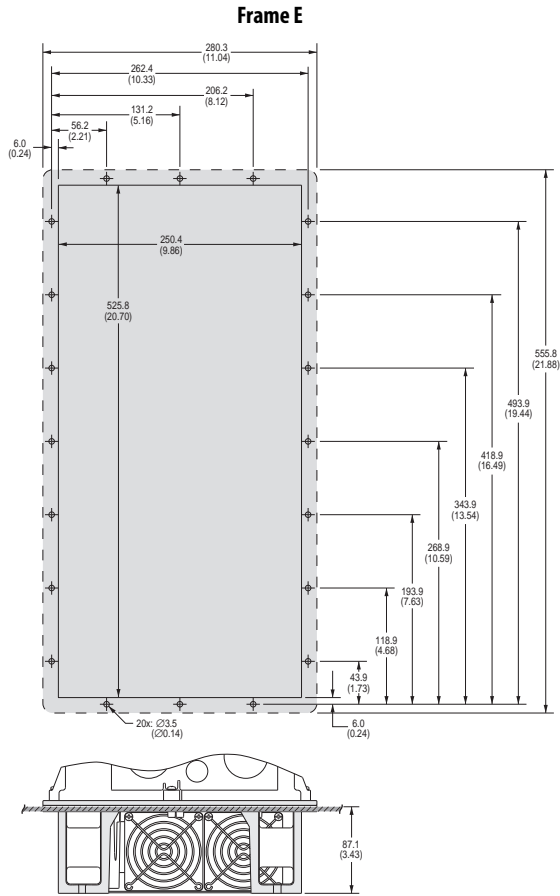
Cutout Dimensions, mm (in.) (continued)
